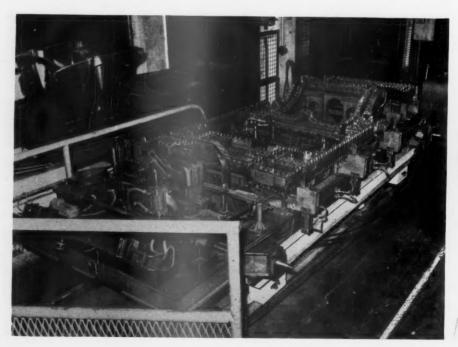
Underbody fixture troller in maintenance bay alongside weldpress line. Mounted on the fixture are 588 adjustable bottom electrodes. Five trolleys are in operation while one is being serviced
